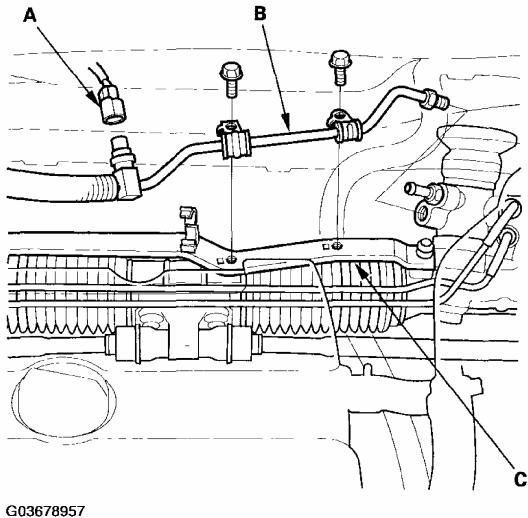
Removing Return Hose Clamp Bolt Courtesy of AMERICAN HONDA MOTOR CO., INC.
